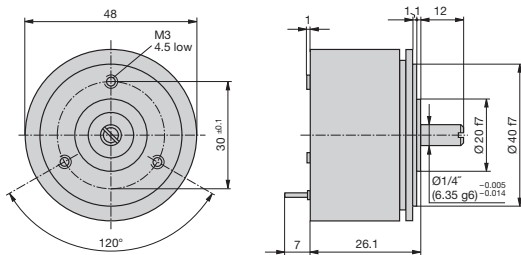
KINAX 3W2 with special drive shaft at front only, Ø 1/4", length 12 mm.
